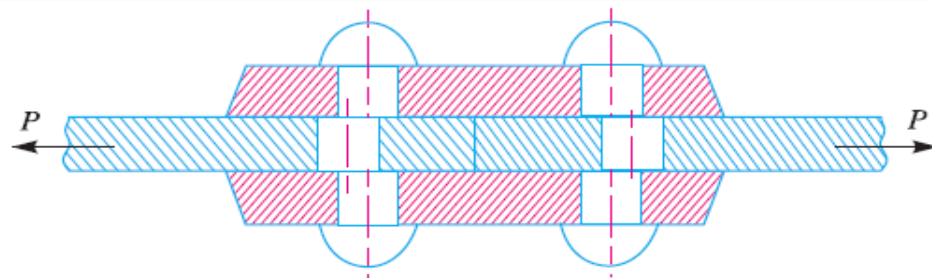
Shearing off a rivet in double cover butt joint.
